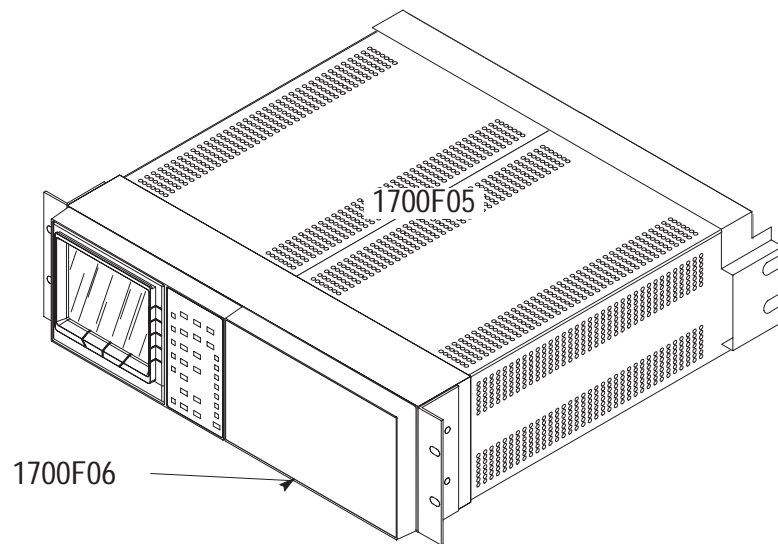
A 1700F05 with a Blank Front Panel (1700F06)
